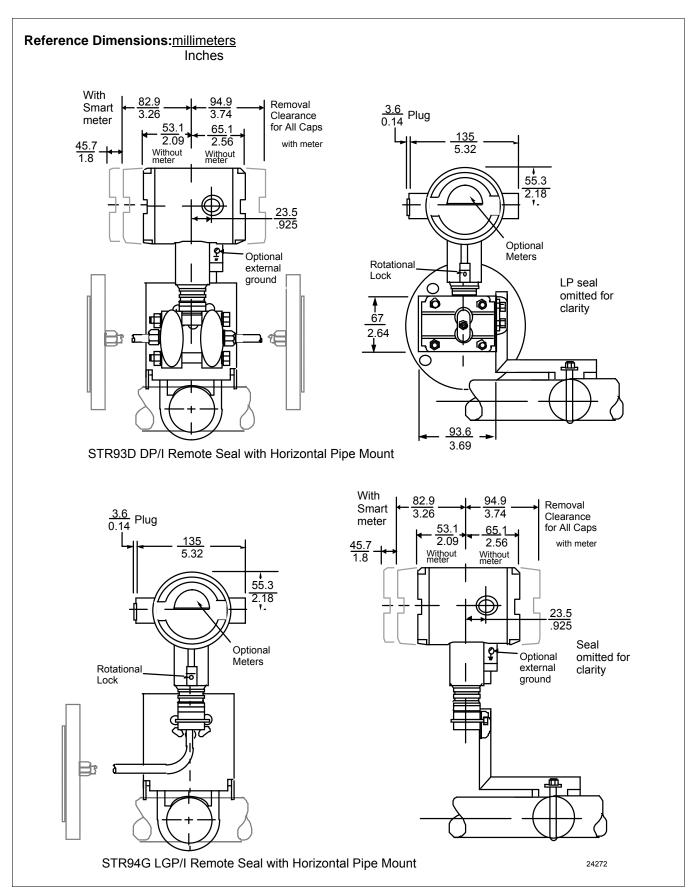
Approximate horizontal mounting dimensions for Remote Seal Transmitter.
